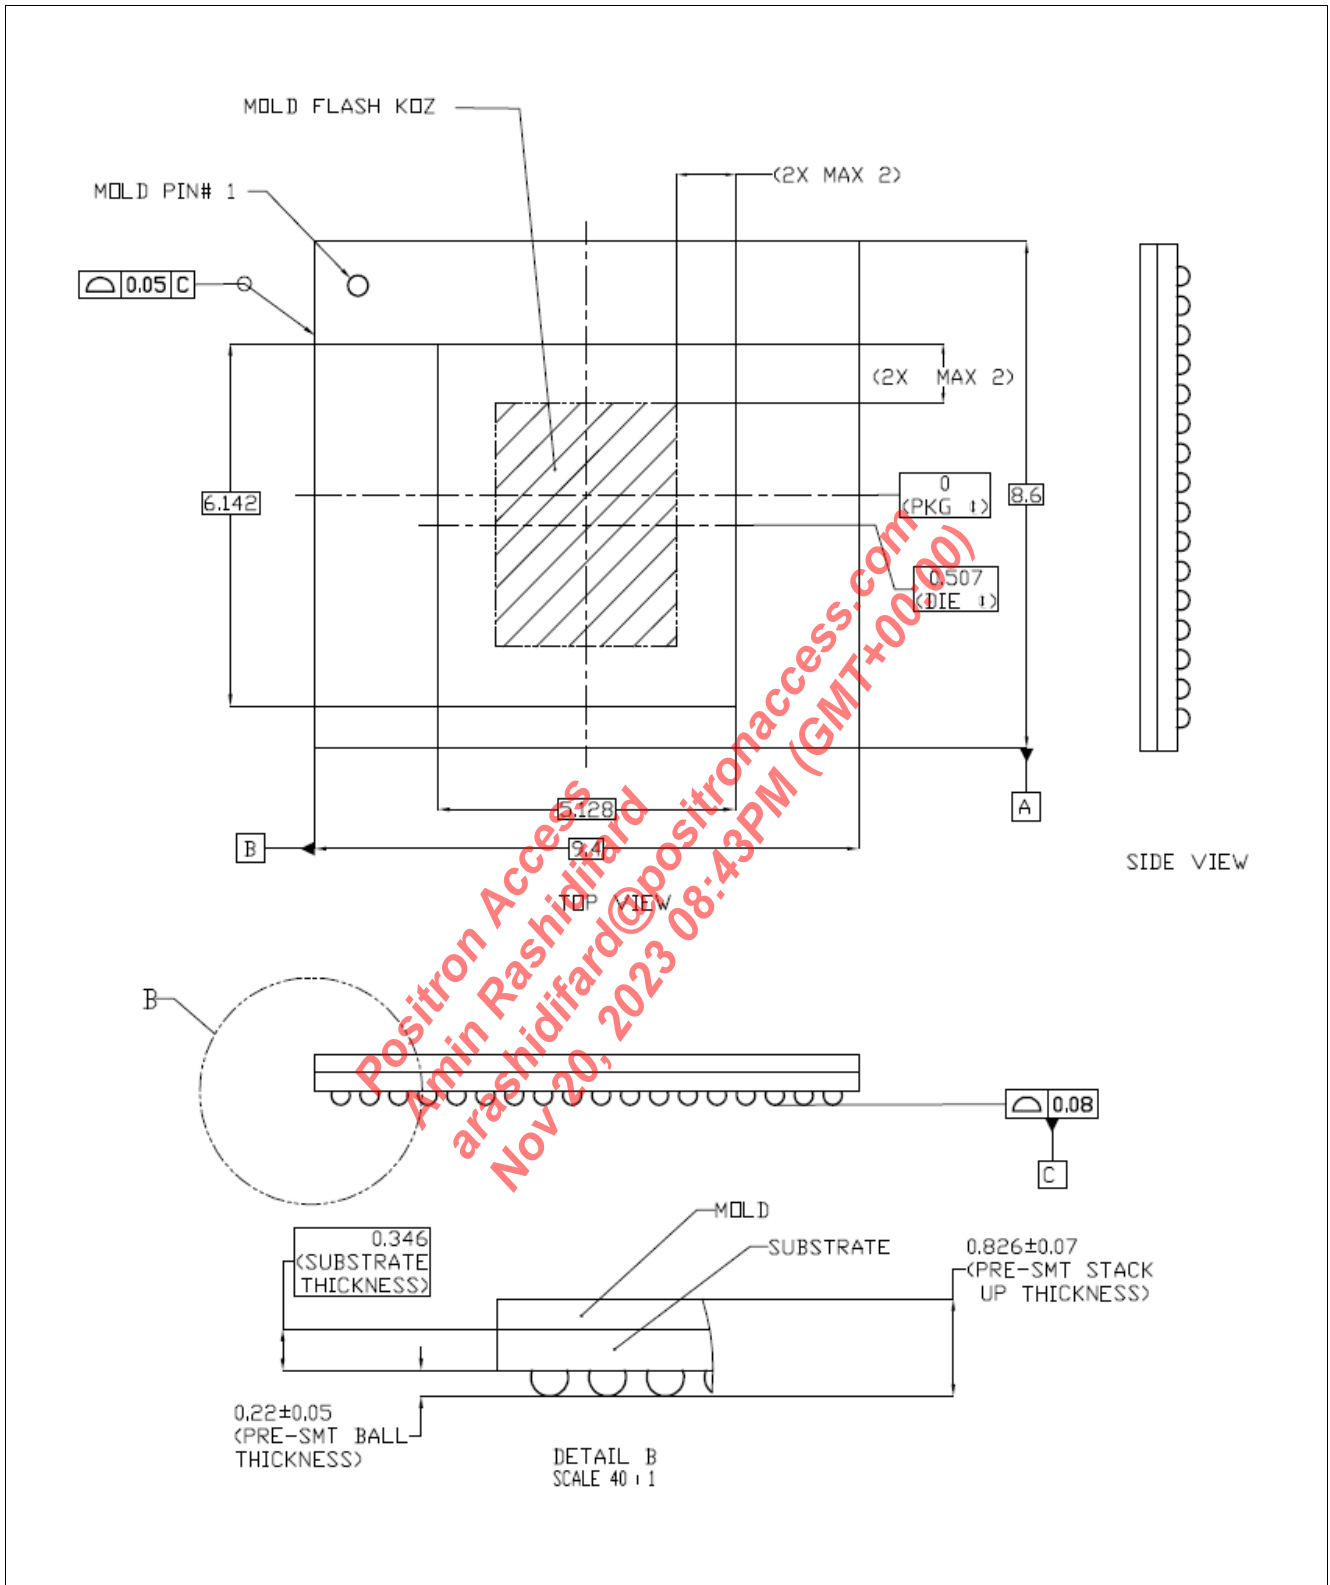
PG-VF2RBGA-287 (Top and Side View)
